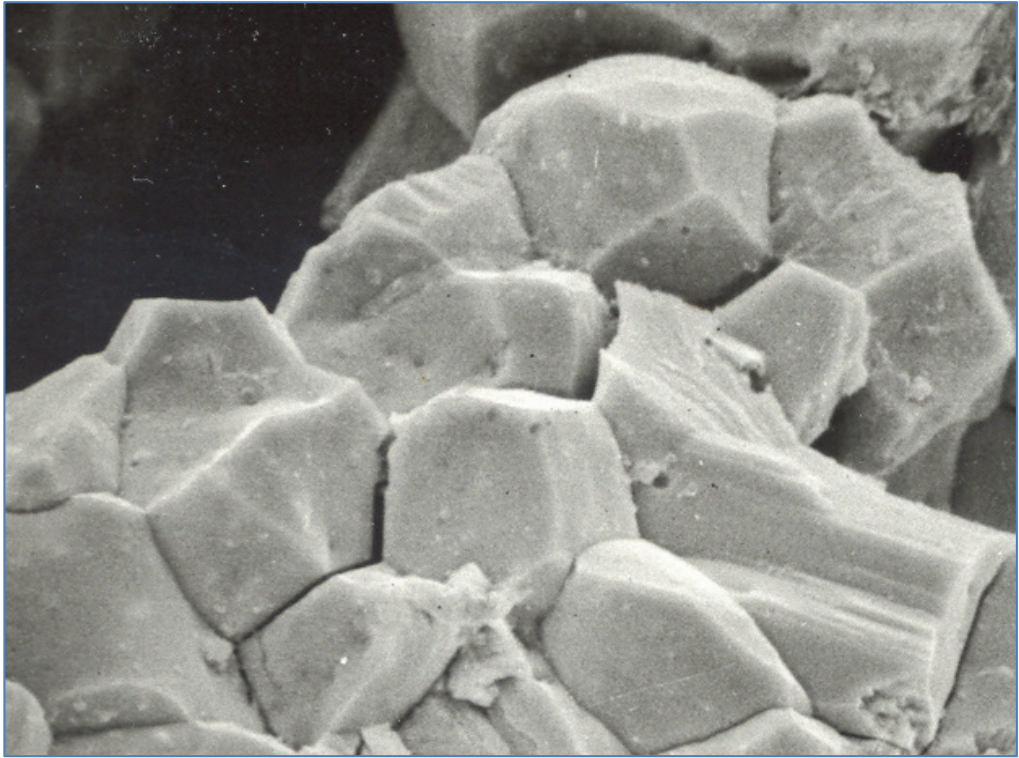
Classic fracture face-Intergranular cracking¹²⁶
